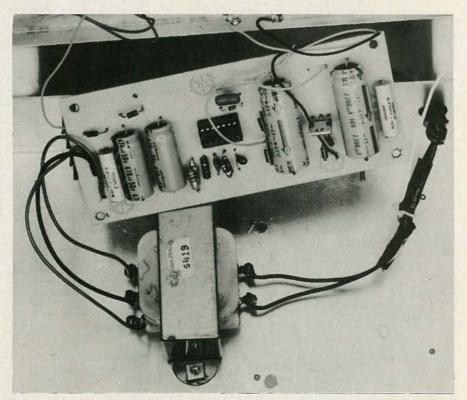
TRANSFORMER IS MOUNTED on chassis-box bottom; power-supply board on standoffs at enclosure's rear.
